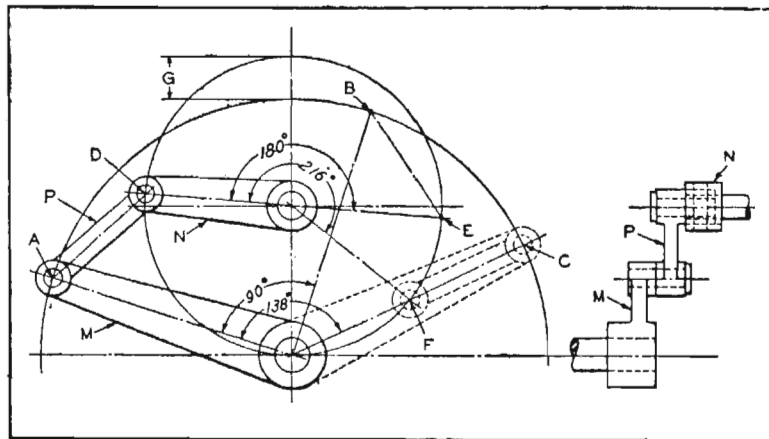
Crank-and-Link Mechanism for Increasing Angular Movement of Driven Shaft.
